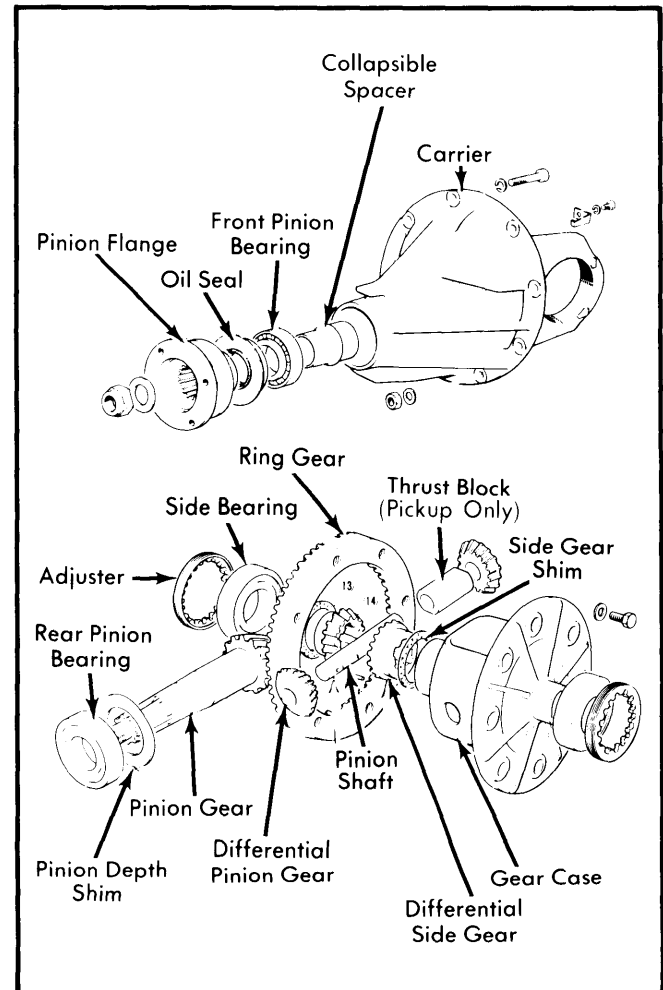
Exploded View of Mazda Rear Axle Assembly
